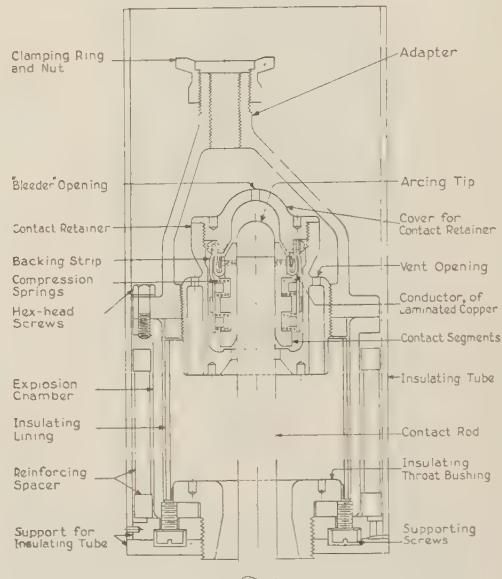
CROSS SECTION OF AN EXPLOSION CHAMBER FOR OIL CIRCUIT BREAKER
